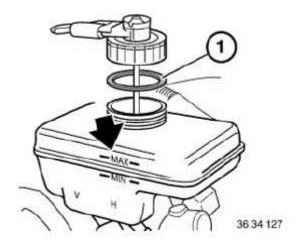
Locating Rubber Seal Courtesy of BMW OF NORTH AMERICA, INC.
